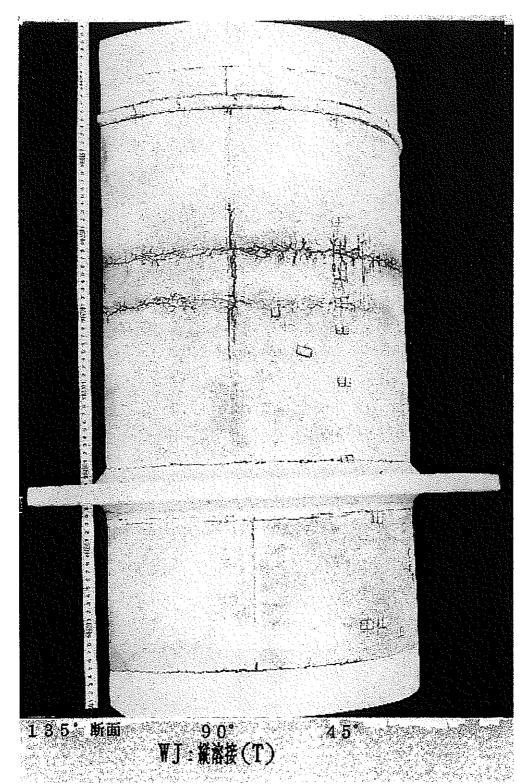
Photograph of initiated cracks on the surface of the inner vessel after 1055 cycles (SUS304 45° - 135° ref: Fig.A4.1)
